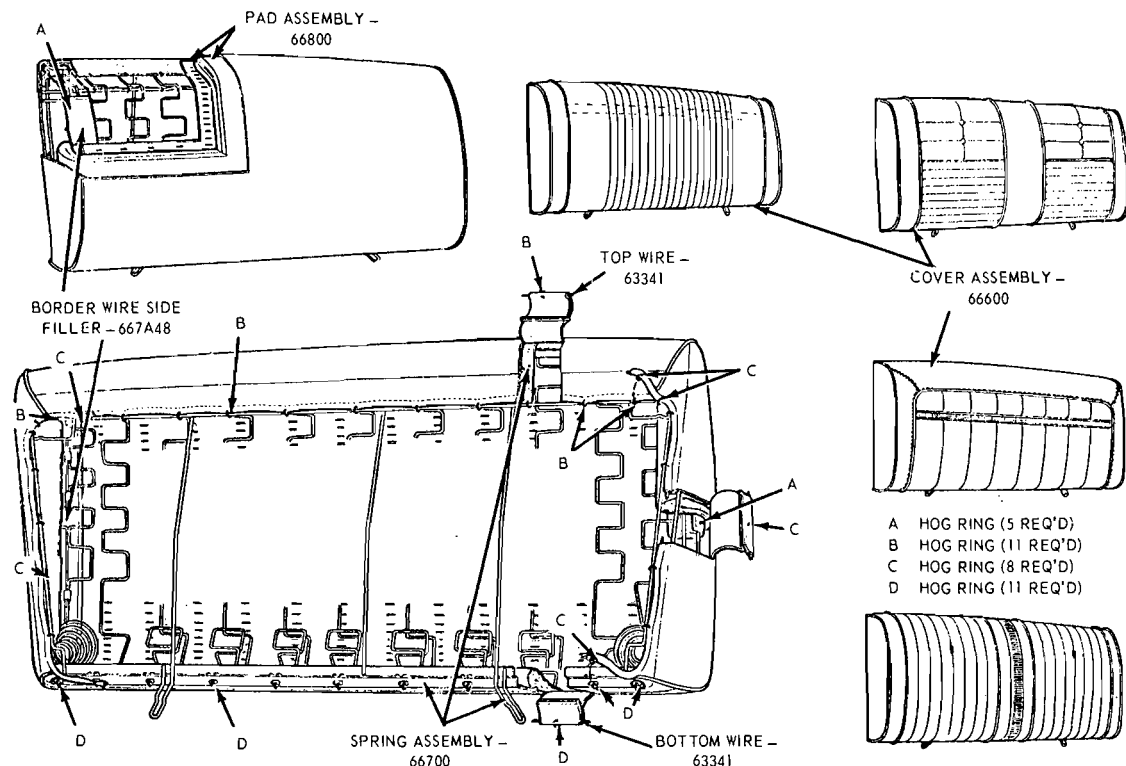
Typical Front Seat Back Cover Installation—4-Door
